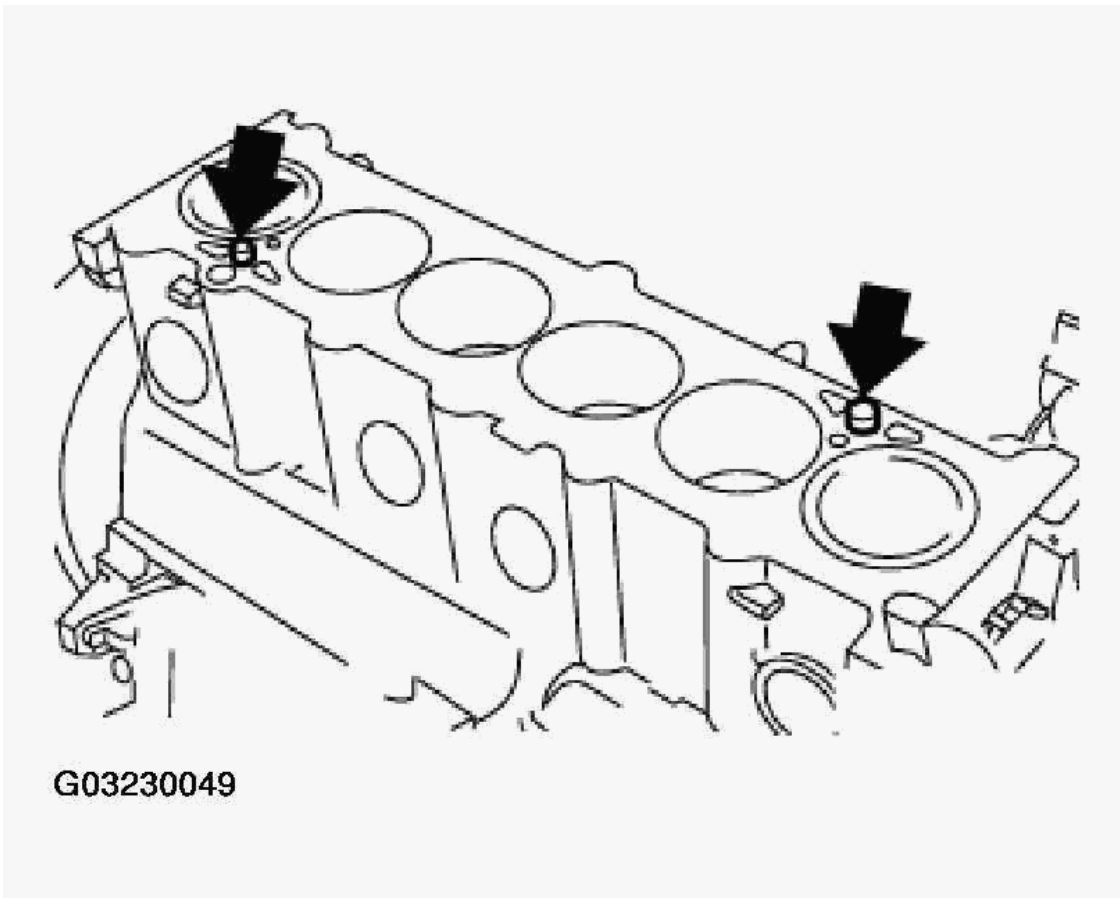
Locating Dowel Sleeves For Cylinder Head
